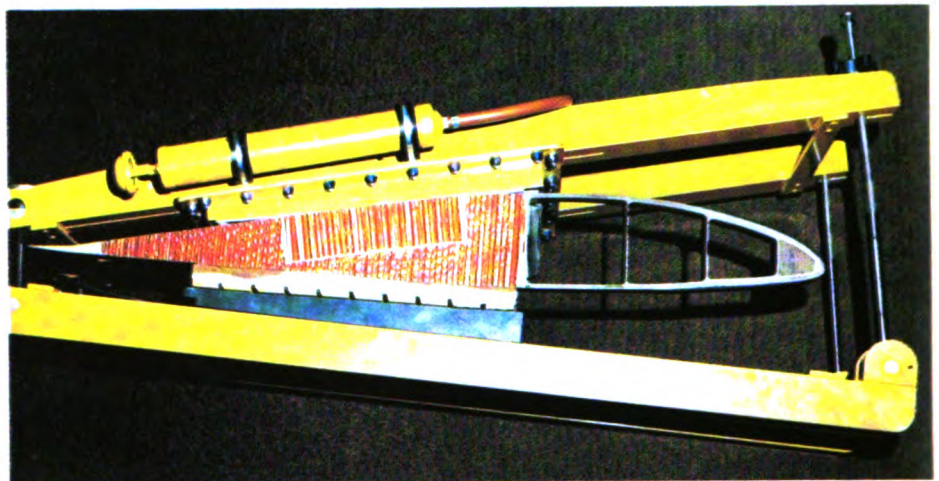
(Right)—heat-pressure pack special tool installed on improved main rotor blade section incorporating repair
